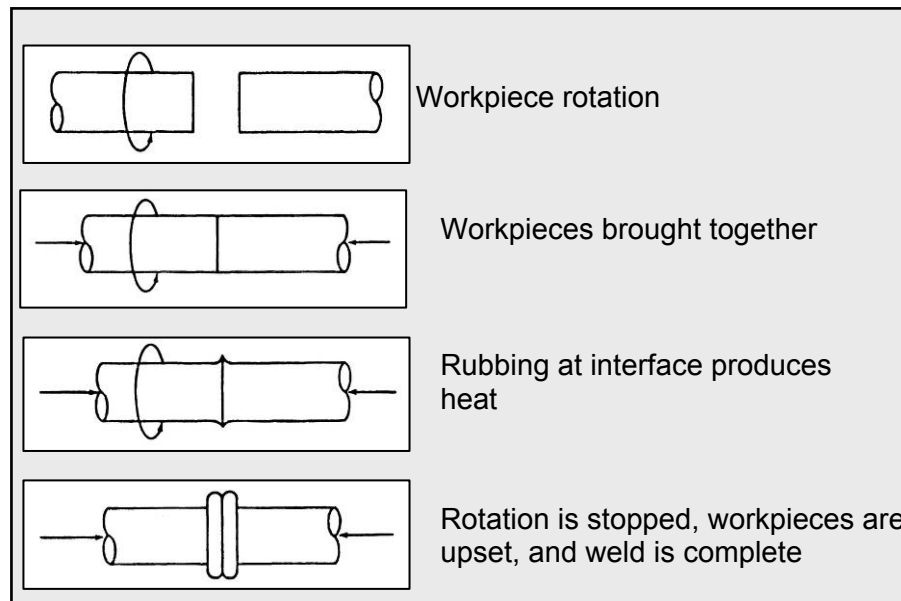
Depiction of Inertia Friction Welding Process
